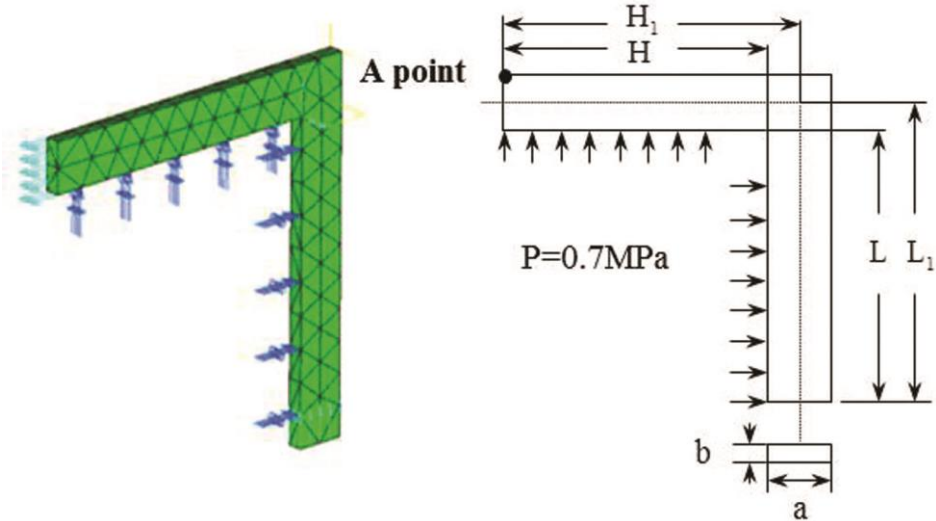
Boundary conditions and schematic diagram of a horizontal girder with rectangular cross-section
